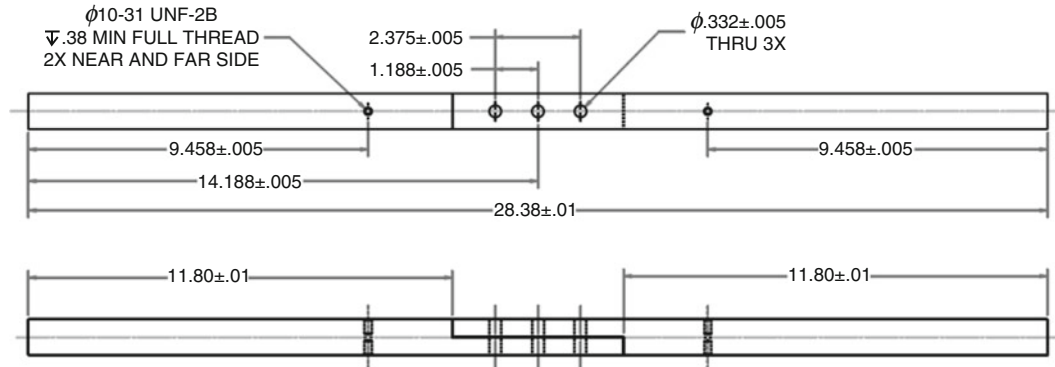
Mechanical drawing of the Brake-Reuss beam and its dimensions (in inches)
